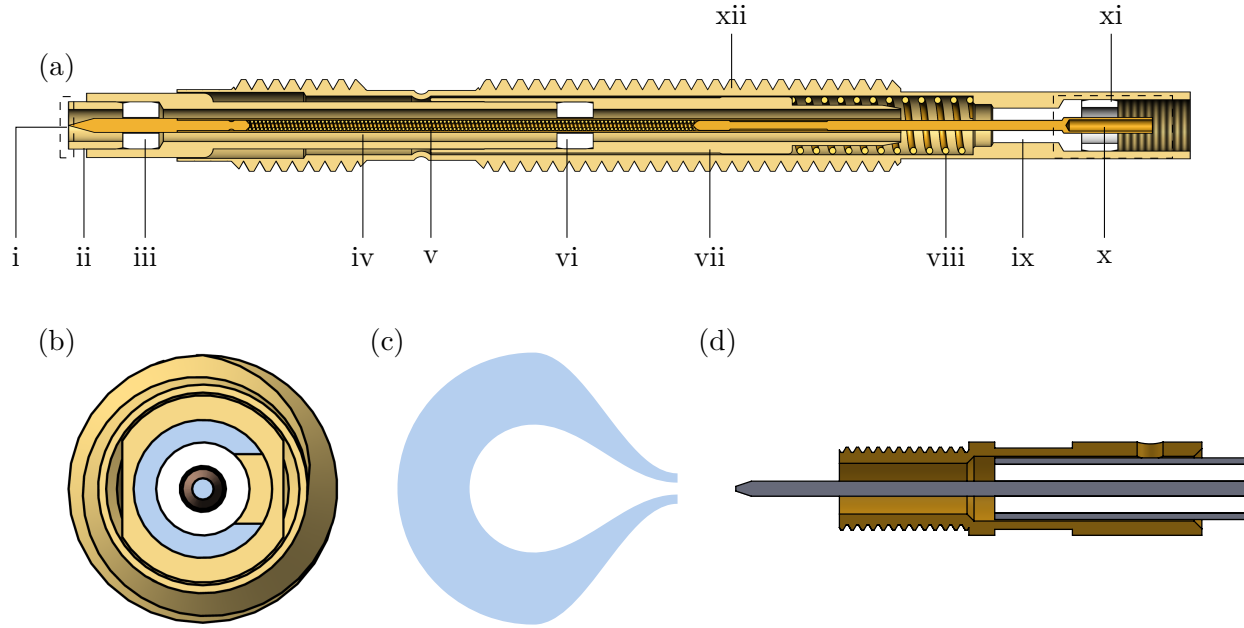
Two-dimensional cut view of the three-dimensional wire, contact pad, and screw-in micro connector. (a) Side view of the wire cross section. The wire components are: i, spring-loaded center conductor of the contact head; ii, spring-loaded outer conductor of the contact head; iii, vi, and ix, dielectric spacers; iv, center conductor barrel; v, center conductor spring; vii, outer conductor barrel; viii, outer conductor spring; x, center conductor tail; xi, outer conductor tail; xii, threaded outer body. The dashed box on the left indicates the contact head; that on the right indicates the female threads included for use with the screw-in micro connector. (b) Front view of the wire. The blue surface indicates the wire bottom interface of the contact head. (c) On-chip contact pad. Here the blue indicates exposed dielectric, with white being the conductive thin film. (d) Screw-in micro connector. The left end of the micro connector mates with the back end of the three-dimensional wire; the right end is soldered to a coaxial cable, the inner conductor of which serves as the inner conductor of the micro connector (slotting into x). ©American Physics Society 2016
